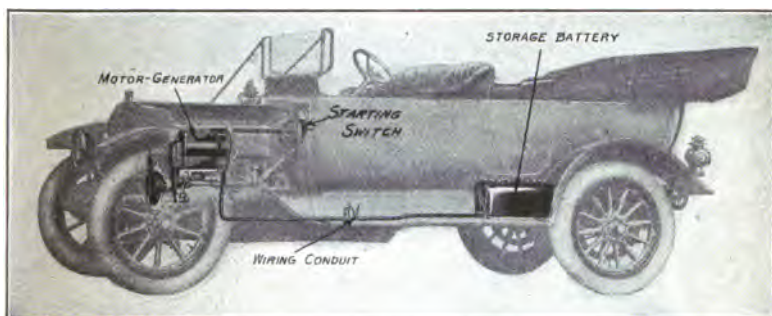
Phantom View of Automobile Touring Car Showing Location of Parts of One Unit Starting and Lighting System.
